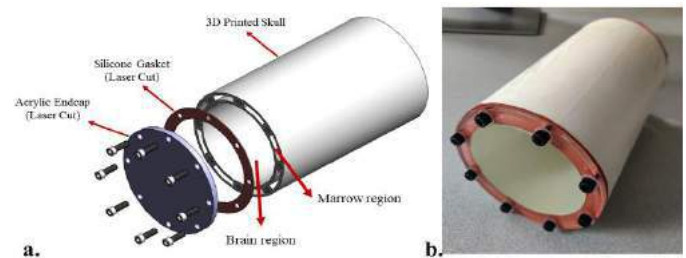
a) Schematic of SBP mold and b) Fabricated mold
